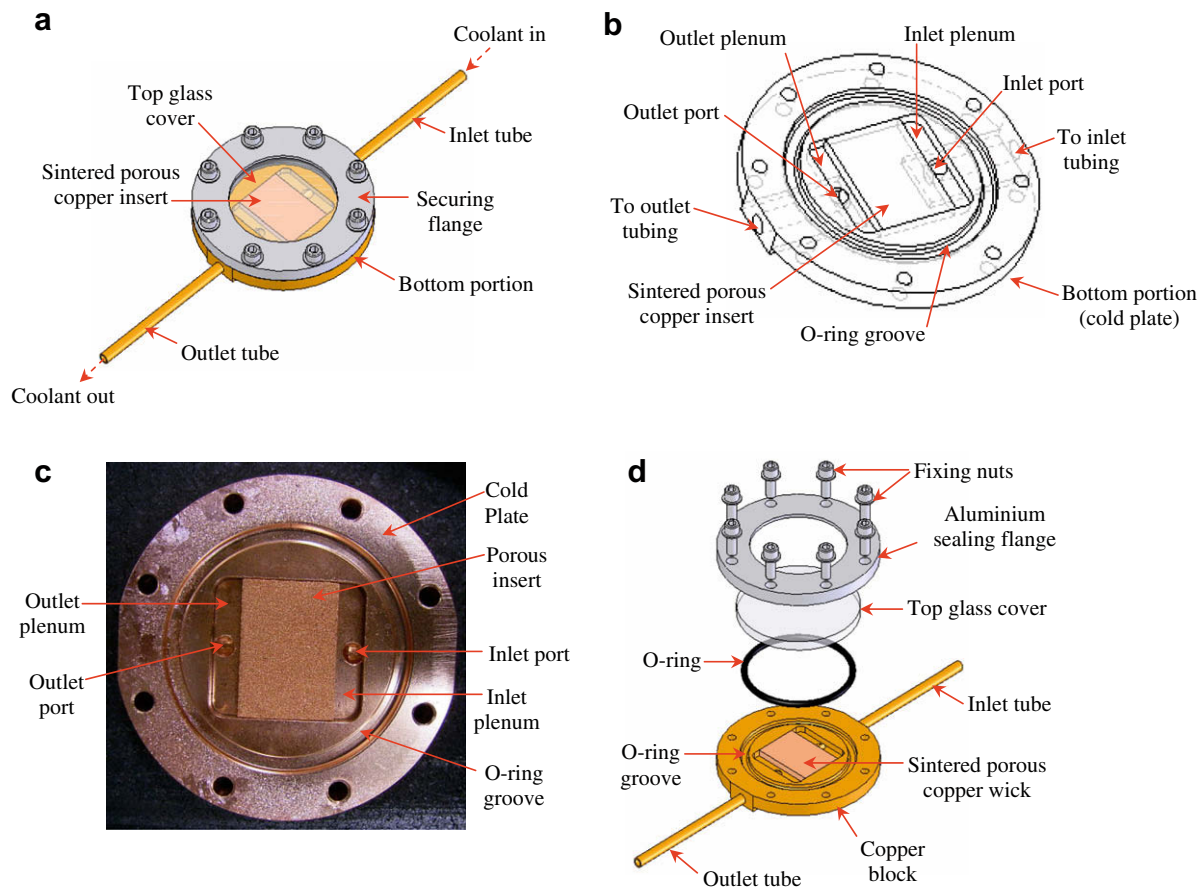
Sintered porous heat sink. (a) Test prototype. (b) Internal details of the heat sink bottom portion. (c) Picture of the cooling section showing the porous copper media attached inside the rectangular channel. (d) Exploded view of the heat sink assembly showing different components.
